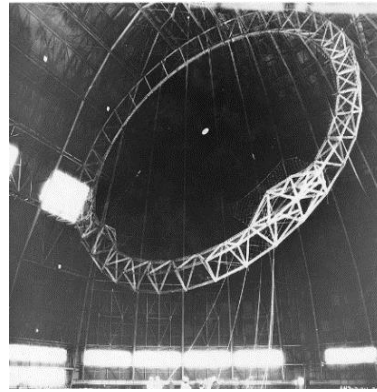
Circular frame assembly Jig of a rigid airship structure [18]
